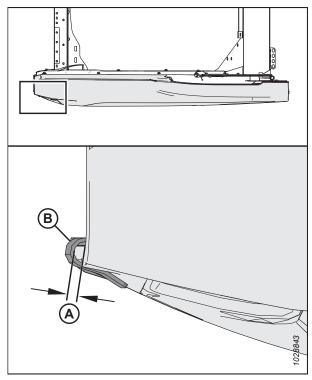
Gap between Header Endshield and Support Bracket – View from Above
